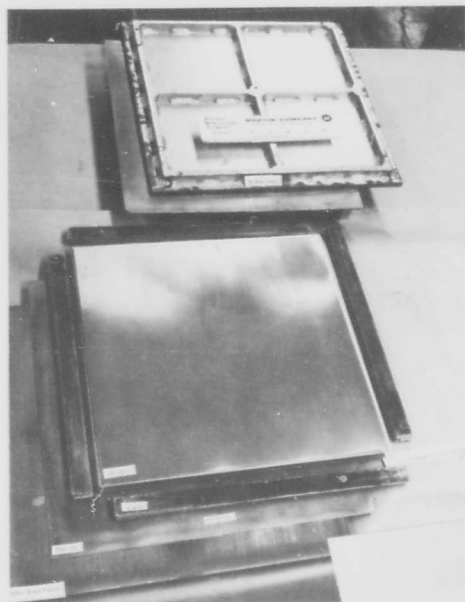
Braze Tool Buildup for Brazing Flat D-36 Columbian Structural Panels
